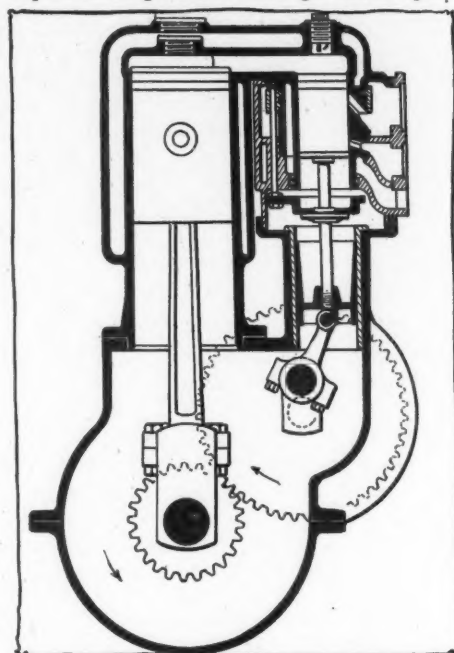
OSBORN SLEEVE-VALVE MOTOR
